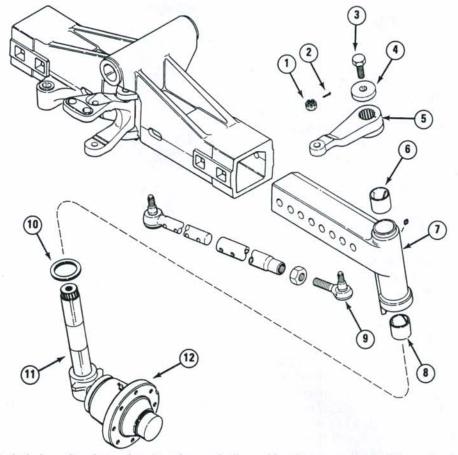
Exploded view showing axle extension, spindle and bushings used on all two-wheel drive tractors.
